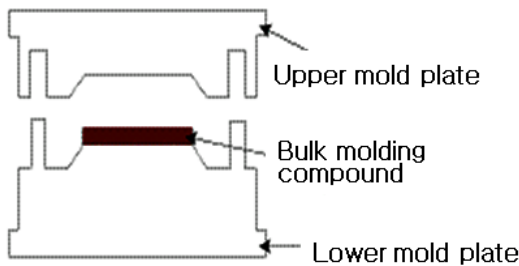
Schematic drawing of compress molding process using bulk mold compound.
